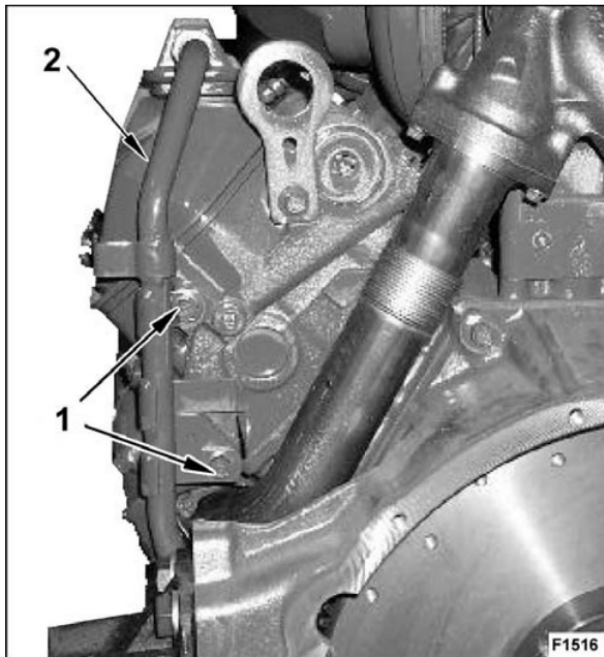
Install Road Draft Tube Mounting Bolts (Engine With Exhaust Bellows Feature Shown)
